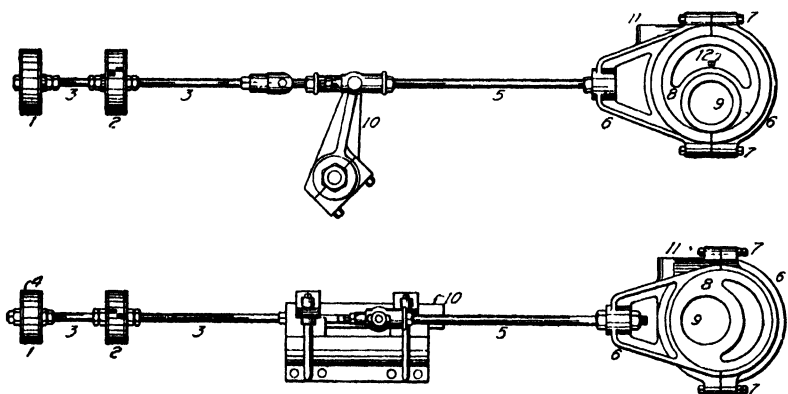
Eccentric Mechanism Showing Rocker and Ram Methods of Connecting Eccentric Rod with Valve Rod
